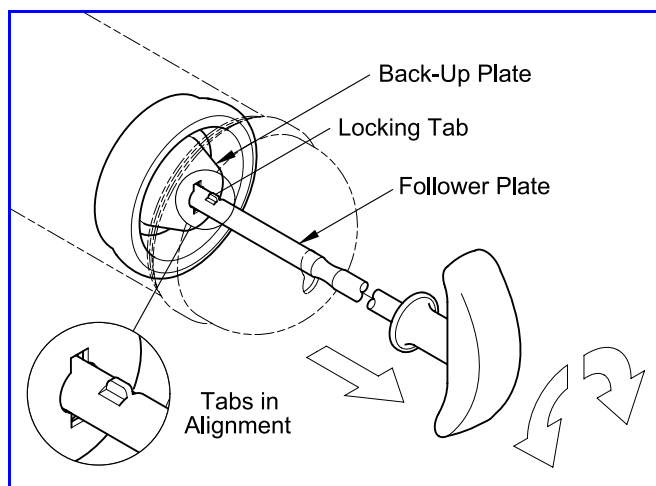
Follower Rod Locking Tabs Aligned with Back-Up Plate
